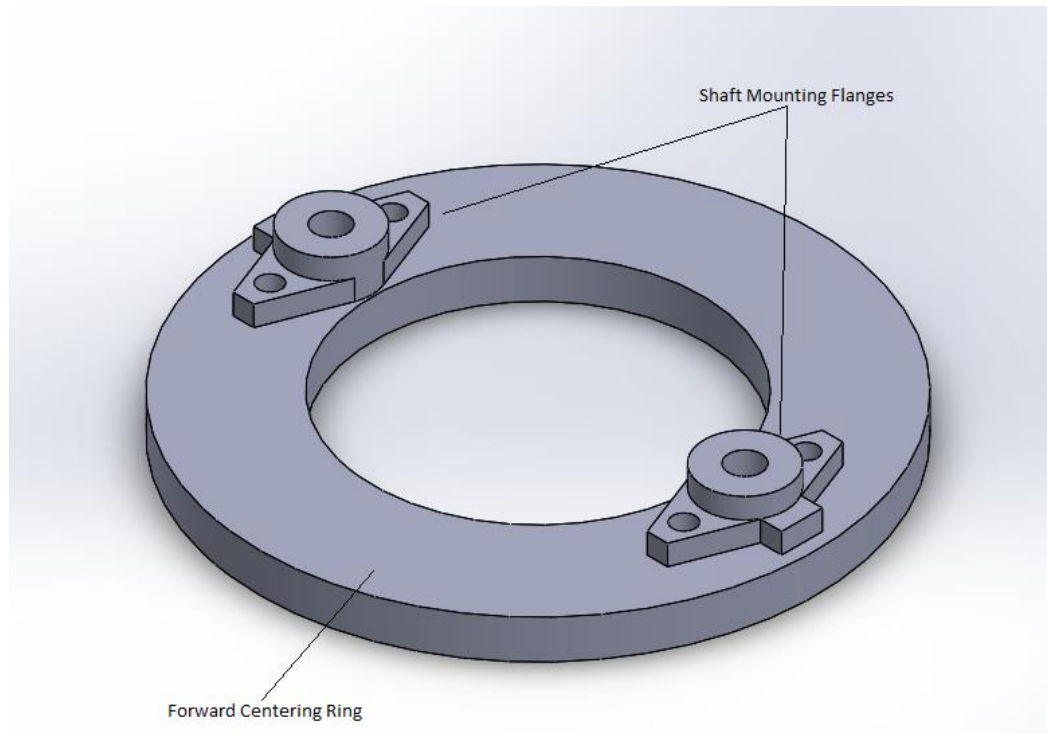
Attaching Shaft Mounting Flanges to the Forward Centering Ring
